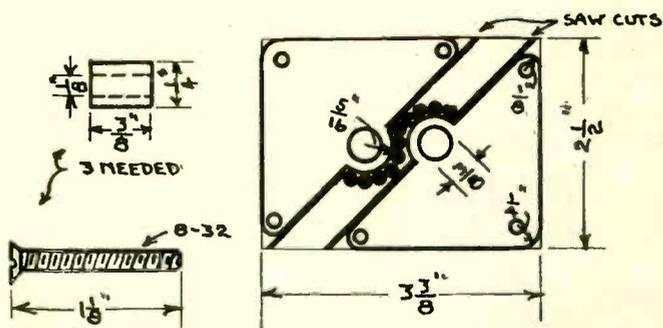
Complete details of the stator plates, bolts, and bushings for the panel mounting of a single-blade vernier.
